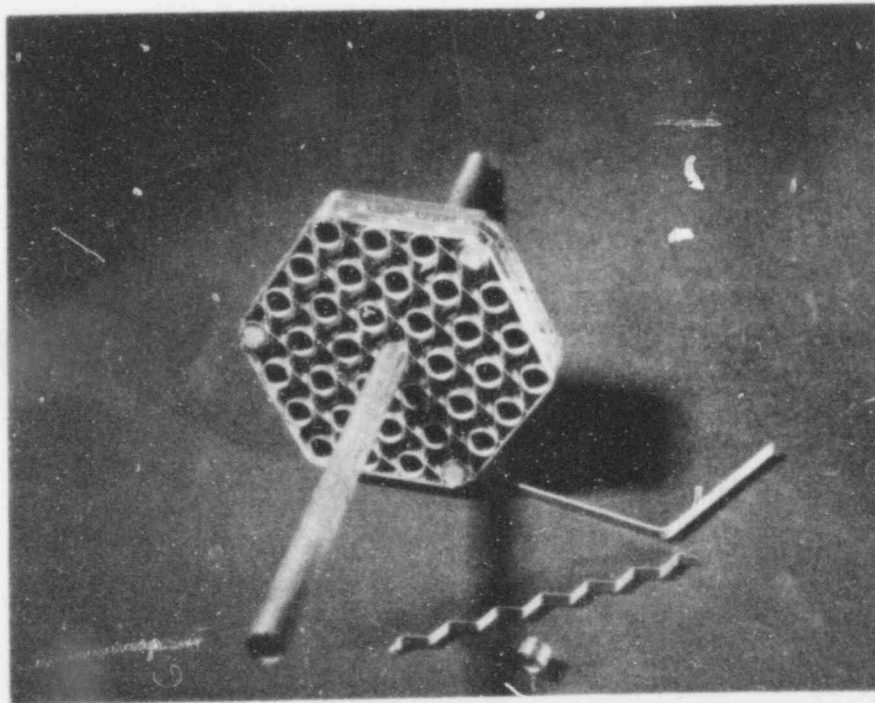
Wave-spring spacer-grid assembly containing cladding segments.
